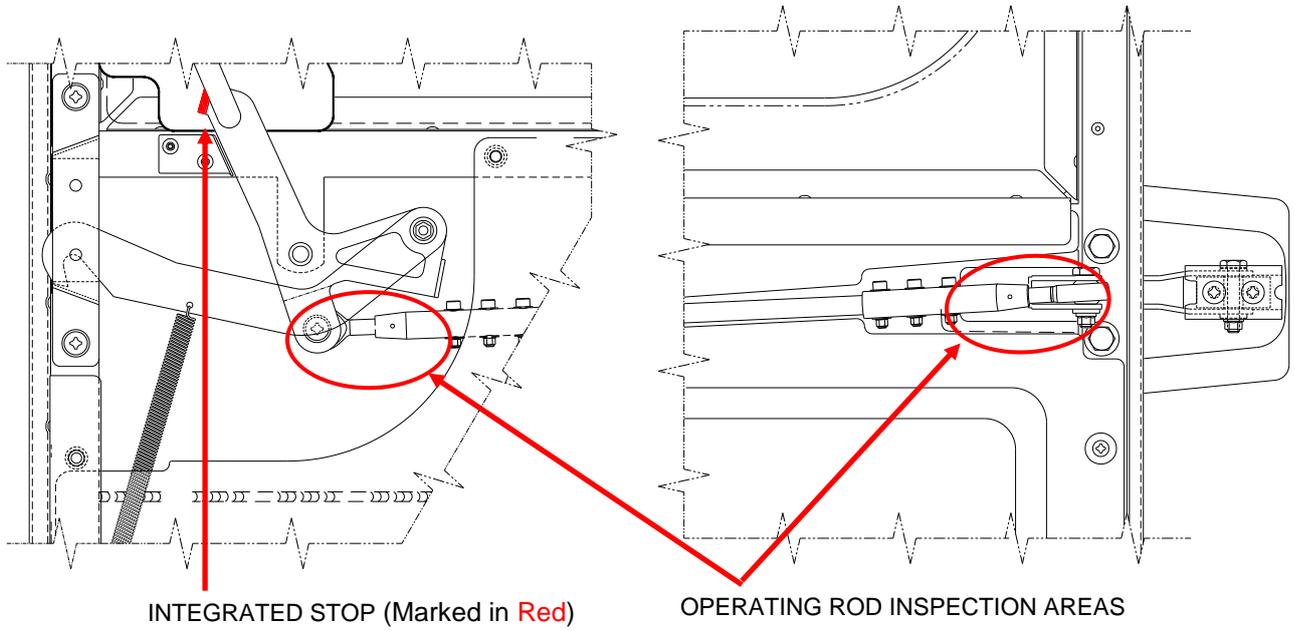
Rear Door Handle Mechanism - Inspection Areas.
